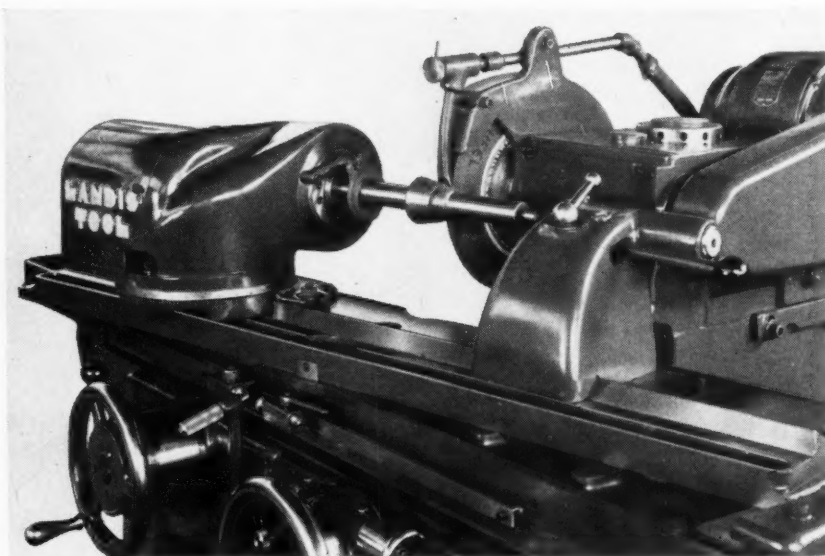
"Grindwell" machine set up for grinding steep taper work
